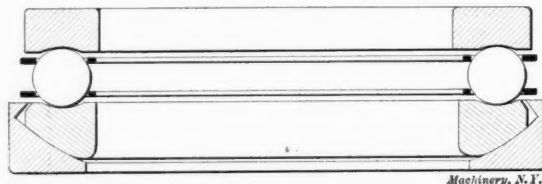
Section through Thrust Bearing, the Lower Race of which is in Two Parts
